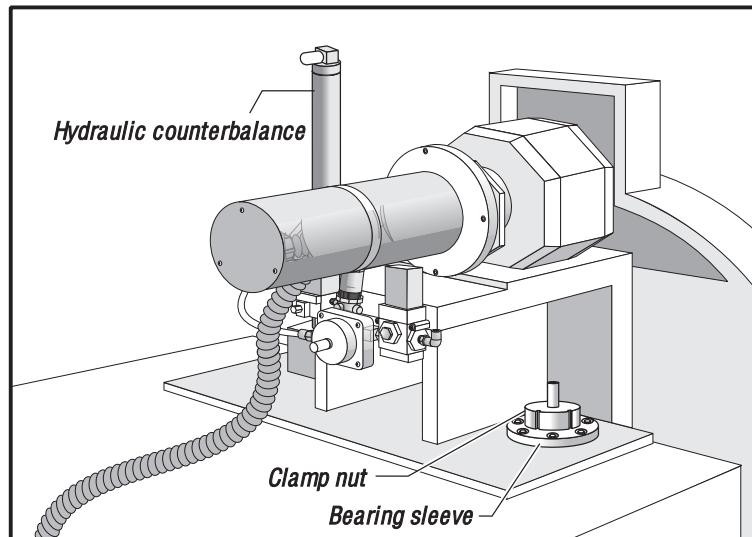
Y-axis lead screw motor end clamp nut and bearing sleeve.
